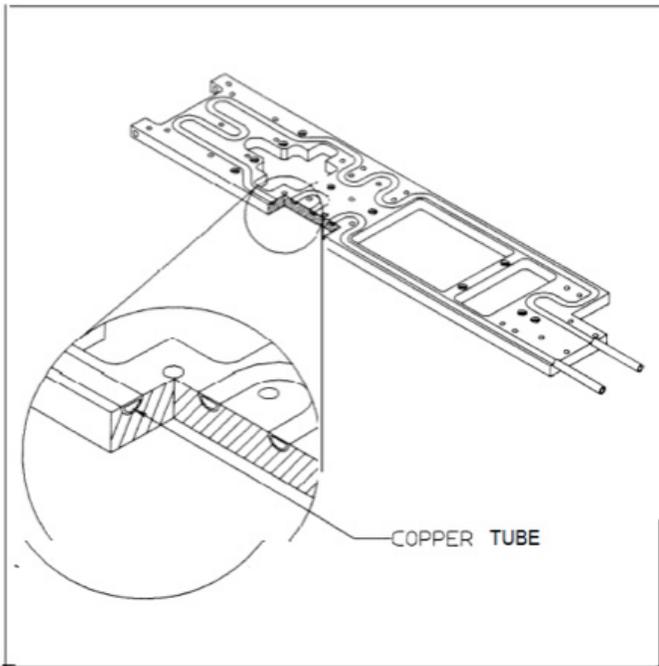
Schematic of the Press-Fit Tube Cold Plate Design [1].
